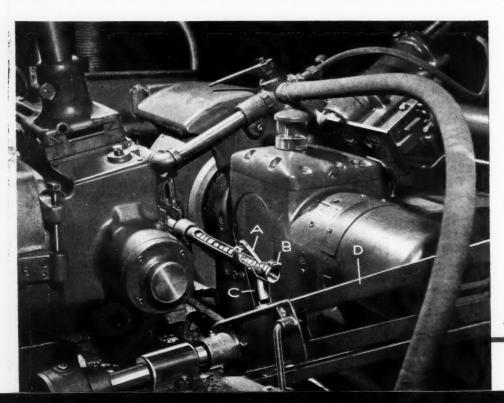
After being Centerless-ground, the Bushings are Correctly Positioned on Conveyor D by Means of the Hinged Levers A and B
